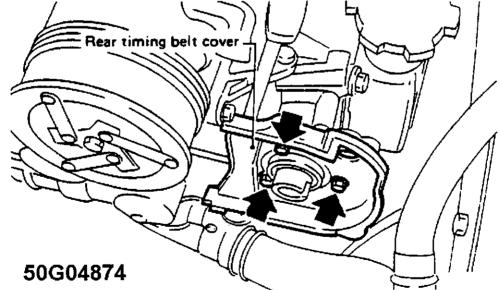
Removing Left Side Rear Timing Belt Cover Courtesy of Subaru of America, Inc.
